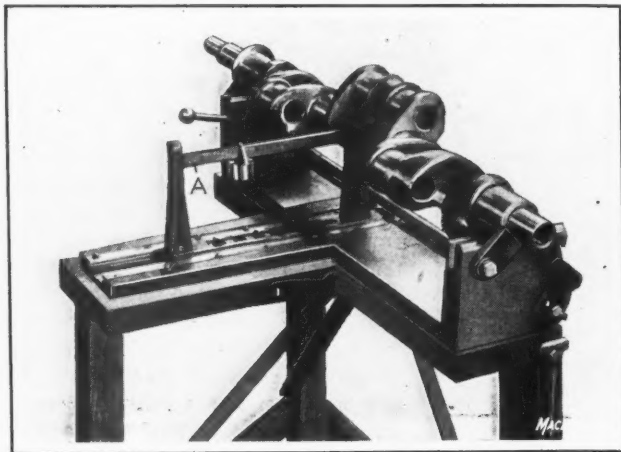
Fixture used for determining approximately the Amount of Metal to remove from Crankshafts to produce Static Balance
